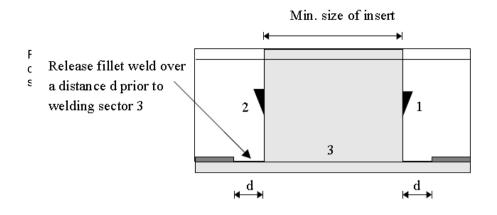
Welding sequence for inserts of stiffeners
